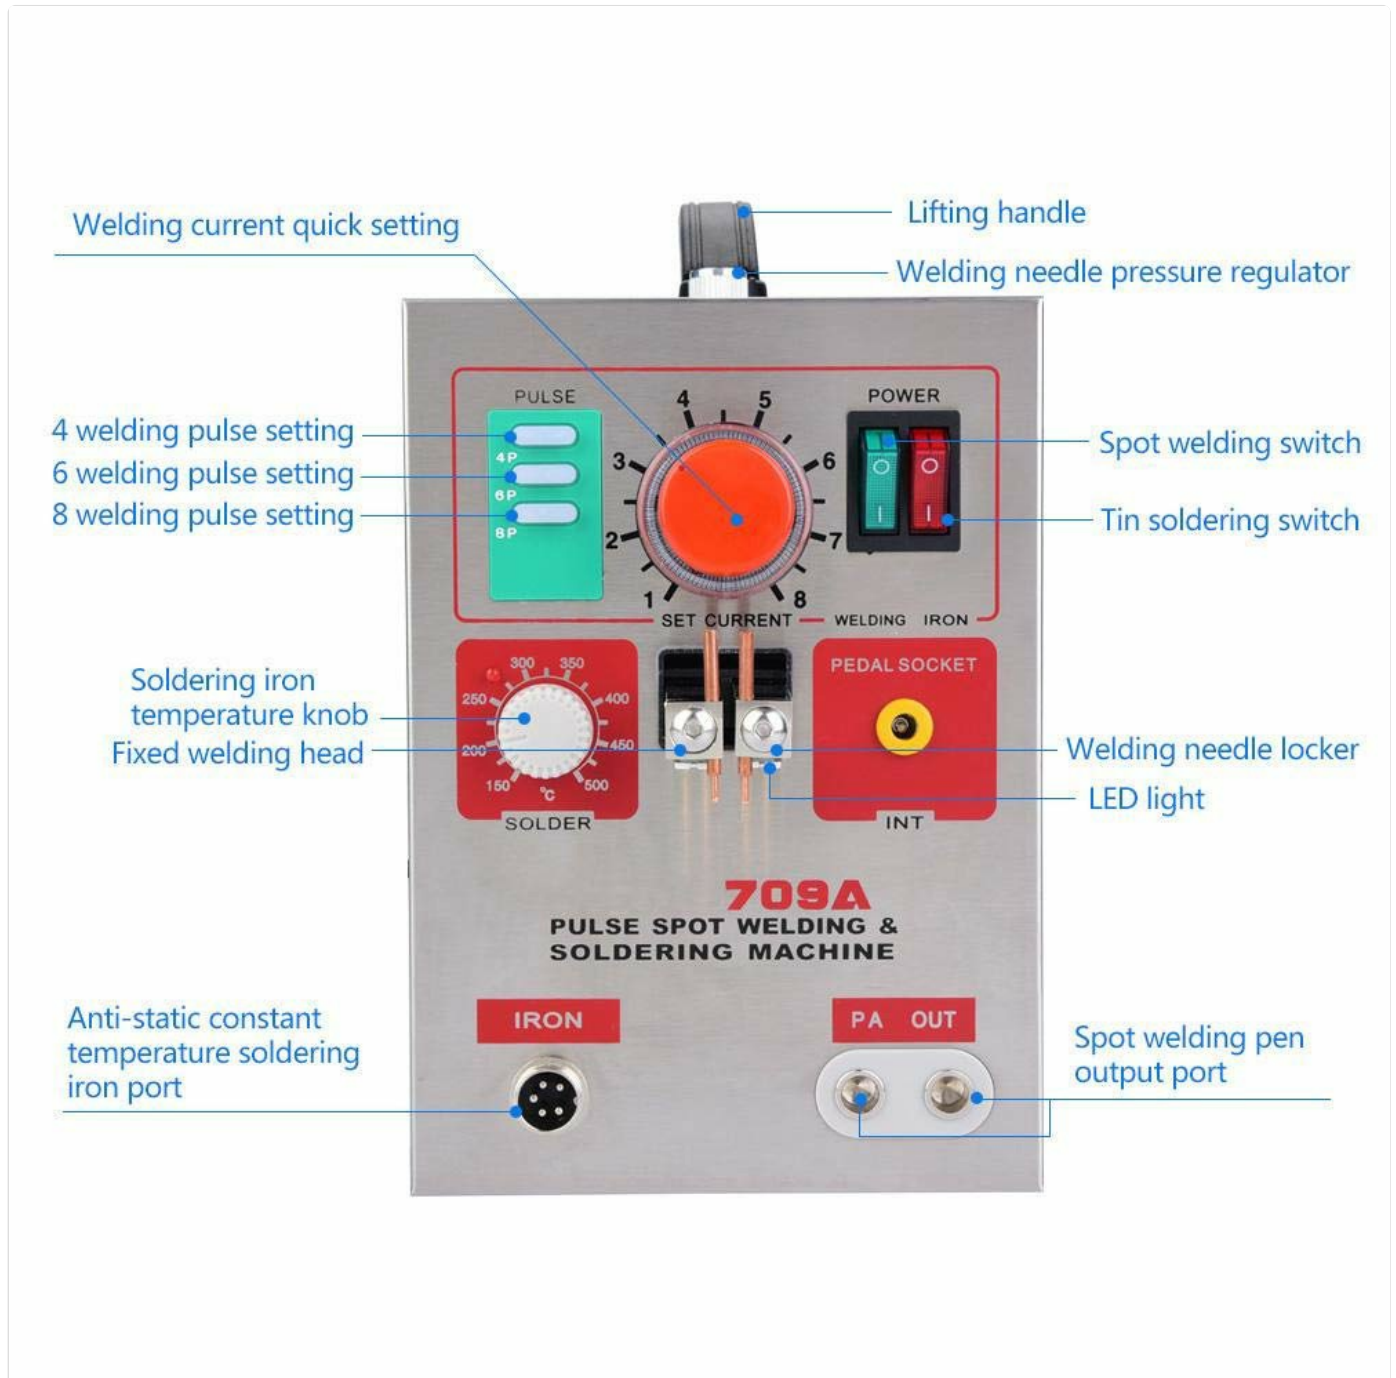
Front panel of the Sunkko 709A spot welder, showing the welding current quick setting knob, pulse setting buttons, spot welding switch, tin soldering switch, soldering iron temperature knob, fixed welding head, welding needle locker, LED light, anti-static constant temperature soldering iron port
